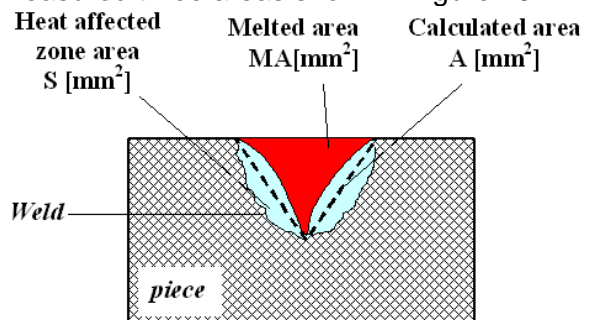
Scheme of variables measured on the weld cross-section
